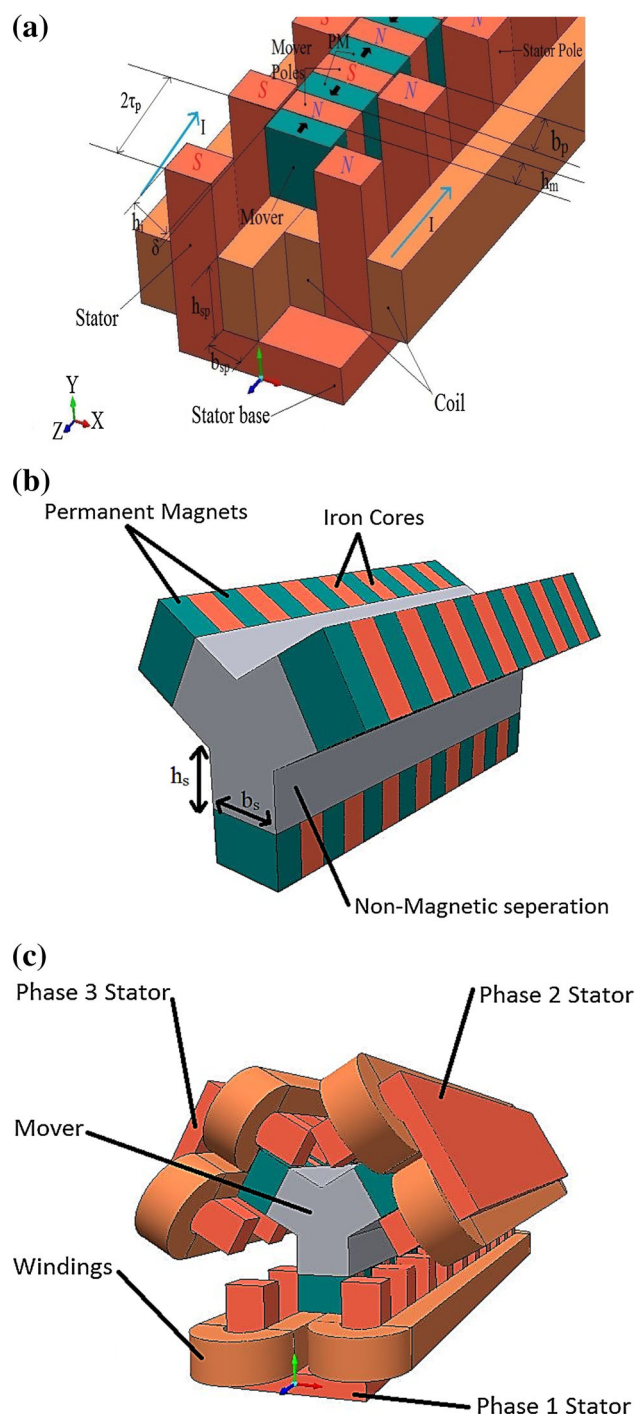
Basic structure of three-phase TFLM a geometric parameters. b Inside view showing inner mover. c 3D front view showing all three phases
